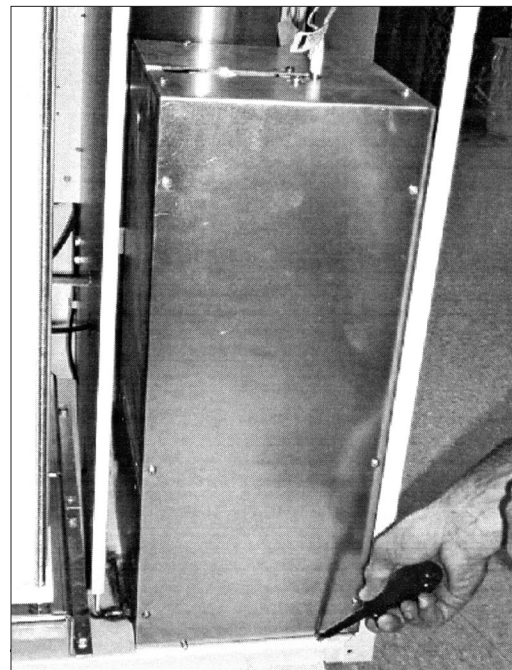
Remove the two screws located at the rear and the base of the catalyst tower
